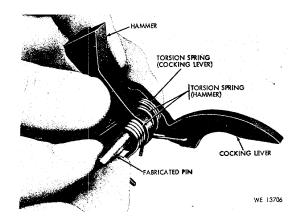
Using fabricated pin to assemble hammer, cocking lever, and allied parts.
